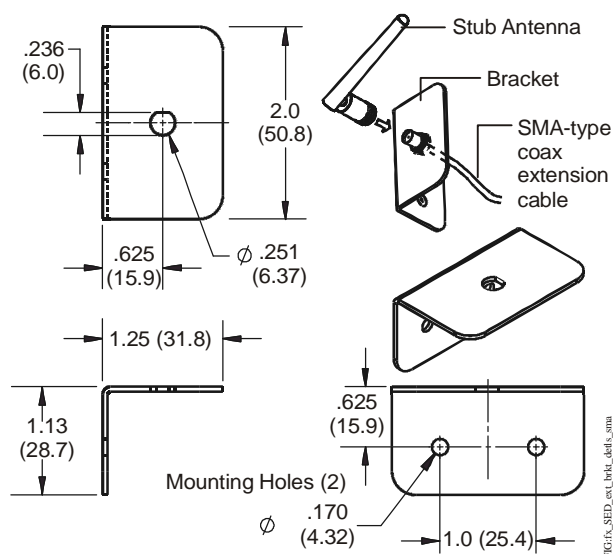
Extension Cable and Antenna Mounting Bracket Dimensions, in. (mm)
